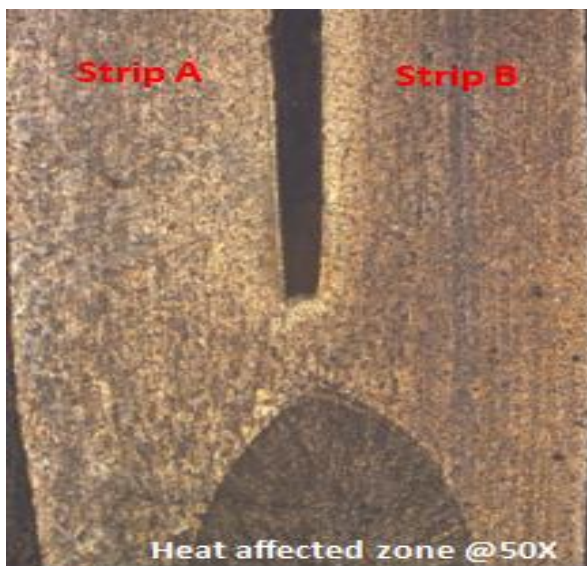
Weld zone for sample 1 @ 50x
